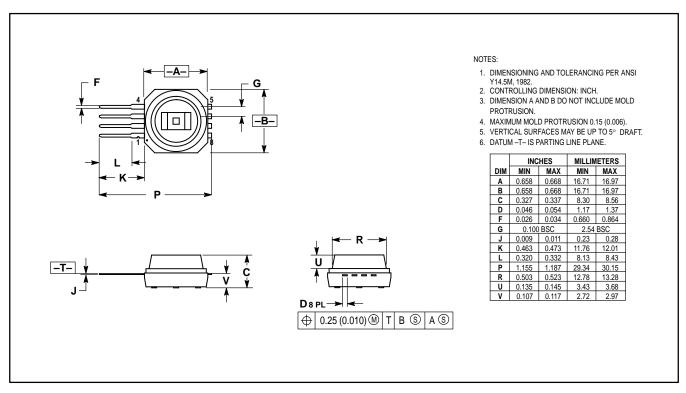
Backside Piston Fit Package with Straight 4–Lead, Lead Form
